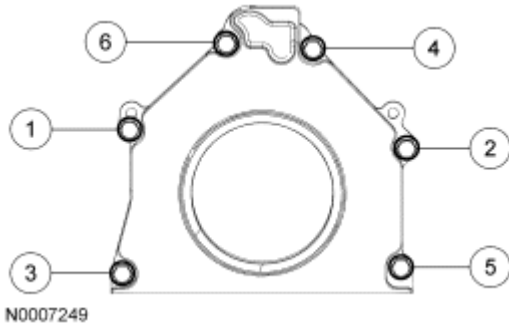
Tightening Sequence Of Crankshaft Rear Seal Retainer Plate Bolts
